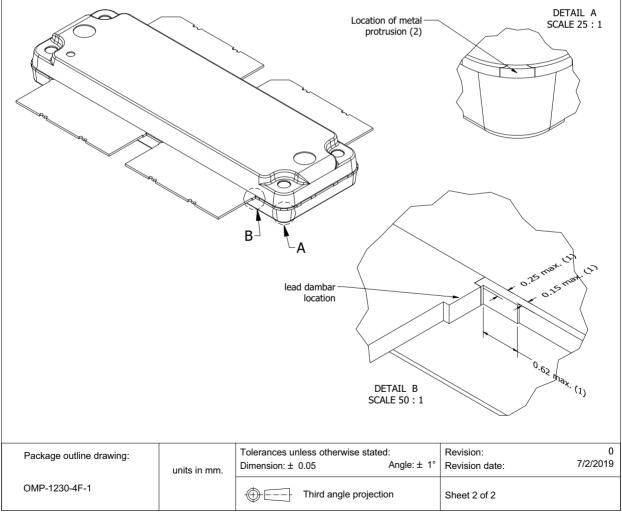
Package outline OMP-1230-4F-1 (sheet 2 of 2)
